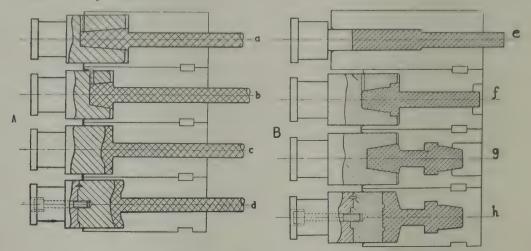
Typical examples of the dies for upsetting and forming ends of the bars: A—Die for production of rear axle for motor vehicle; B—Die for production of combined gear blank: (a) First upsetting; (b) Second upsetting; (c) Preliminary forming; (d) Final forming; (e) Upsetting of the first end; (f) Forming of the first end; (g) Upsetting of the second end; (h) Forming of the second end
